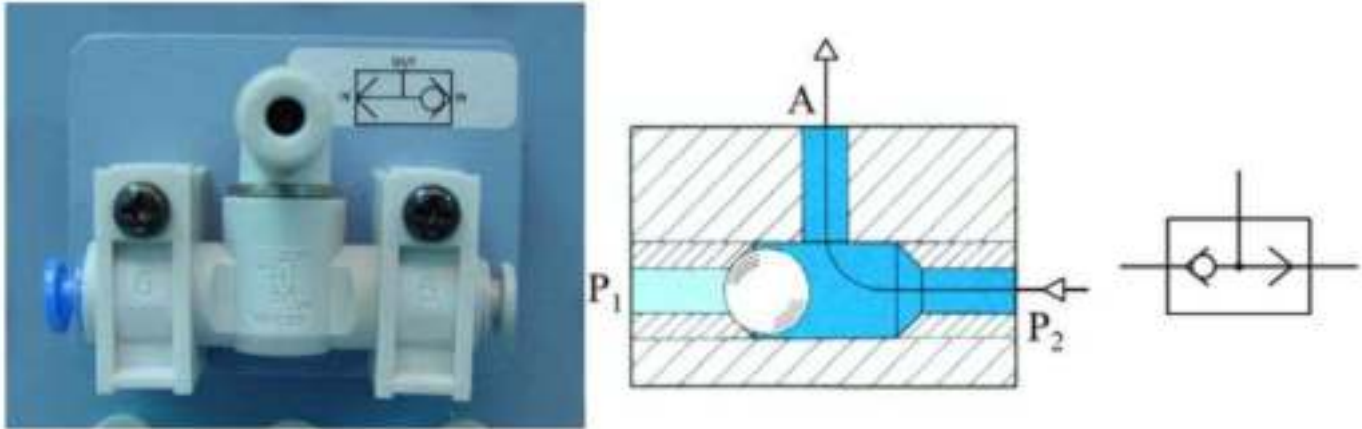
(a) Shuttle valve (b) Cross section (c) Pneumatic symbol
